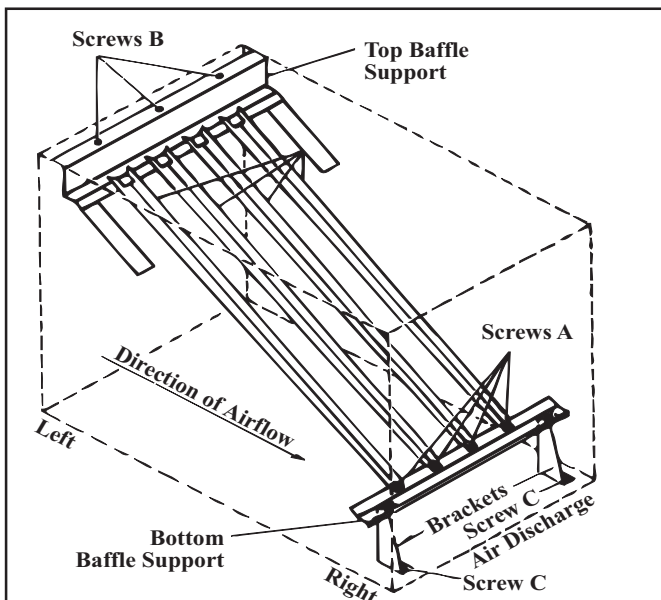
When cleaning outer heat exchanger surface remove directional air baffles. Remove Screws "A" and slide baffles out. Clean and replace all baffles.
